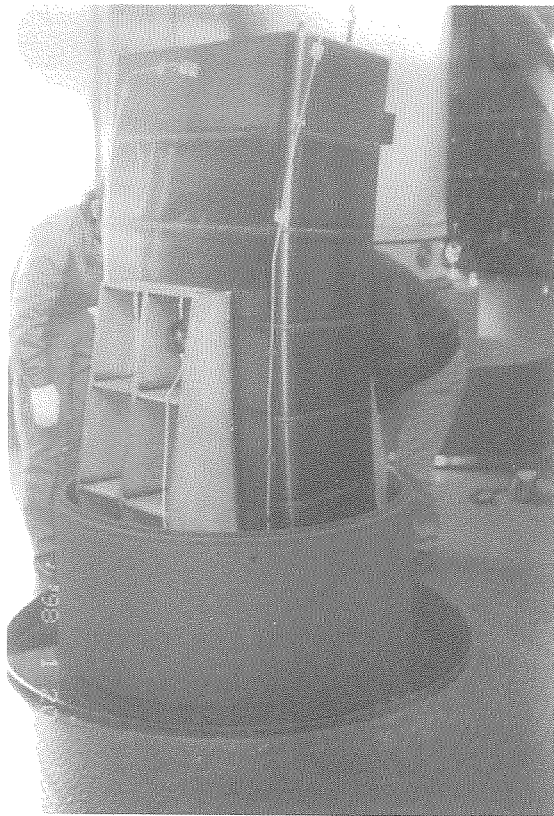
Assembly of the first wall elements with the shield block into one assembly. Assembly of the semi-circular grooved DSCu plate (plasma-side)
